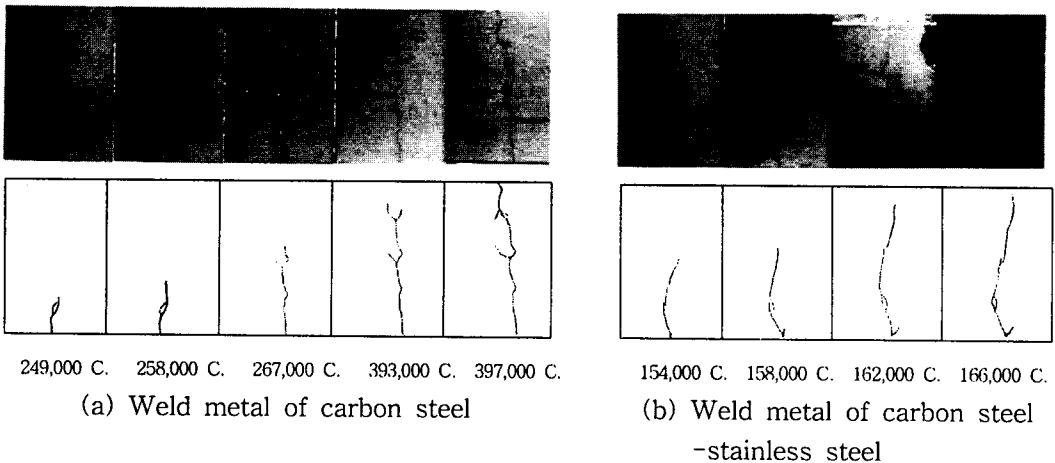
Observation of surface replica on the base metal and weld metal of bimaterial, carbon steel and stainless steel
